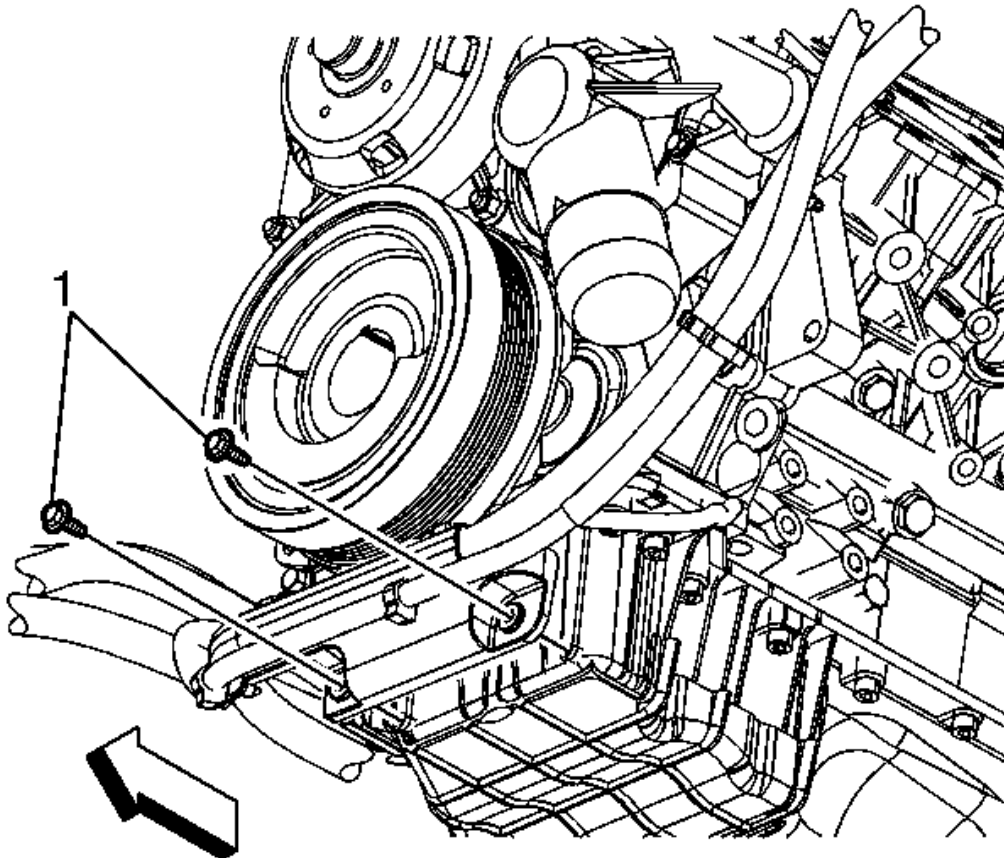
View Of Starter Solenoid Cable Channel Bolts
